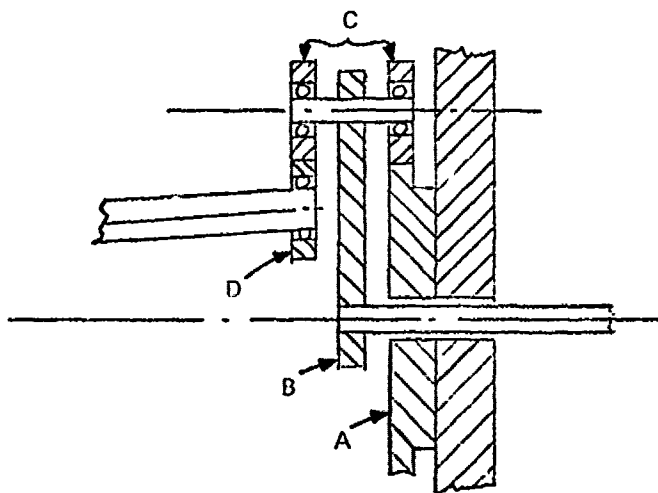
Planetary gears used to introduce third-harmonic motion.
